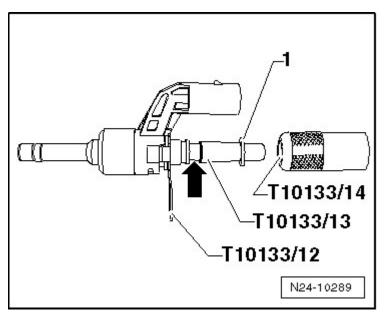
Identifying Support Washer With Sizing Sleeve T10133/14 (Knurled Side Faces Toward Fuel Injector) And Fuel Injector
